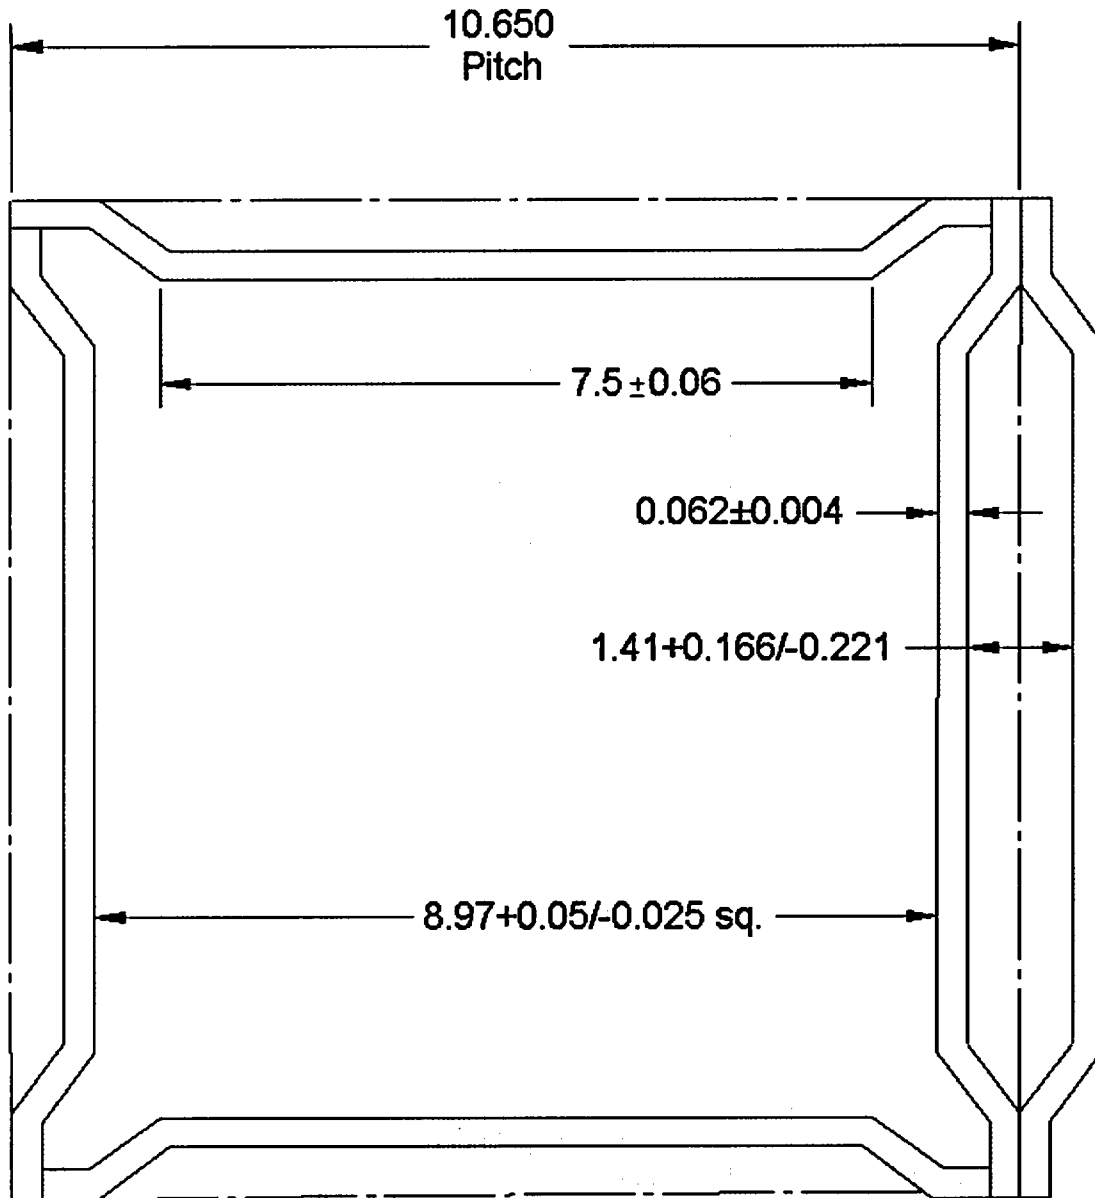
Sketch of Region 2 Racks, Detailing Important Dimensions and Tolerances. (NOT TO SCALE, all dimensions in inches)^[26]
